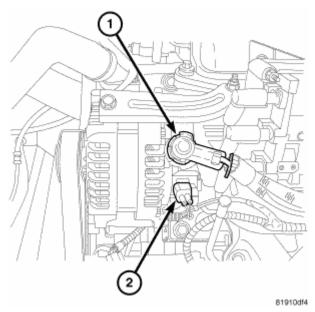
Generator Electrical Connectors 3.8L Courtesy of CHRYSLER LLC
